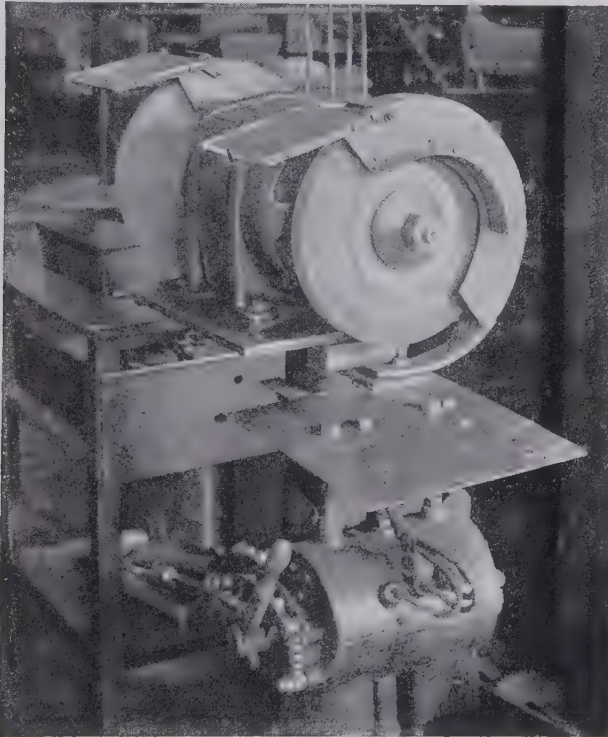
Properly guarded grinding wheel. (Courtesy General Electric Co.)
